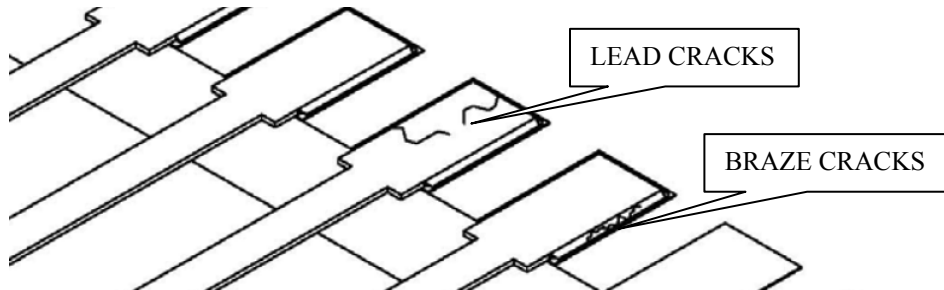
Lead to pad braze attachment cracks and lead cracks
